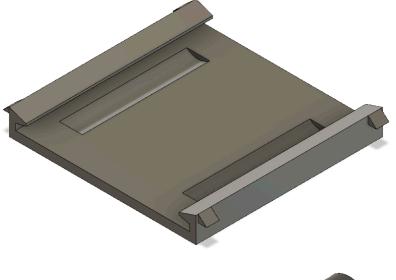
This component is made from PLA using a 3D printer. PLA is a hard plastic. This is to control the maximum amount of bend that can occur on the piezo buzzer, and will be referred to as the buzzer base
